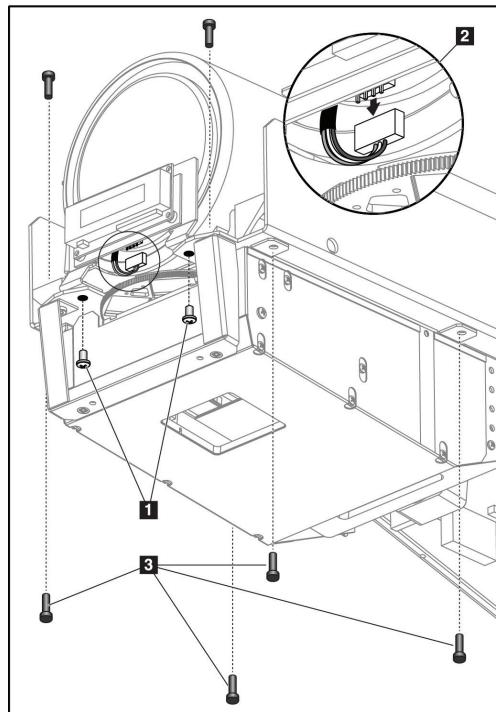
Lower Cover Mounting Bracket Removal and Display Connection
